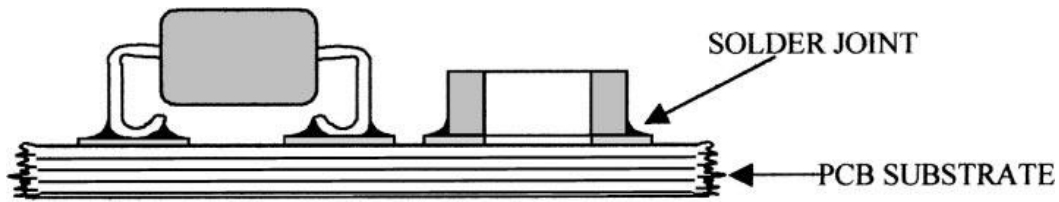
Cross-section of a surface mount connection of a microelectronics component with leads on a printed wiring board [2].
